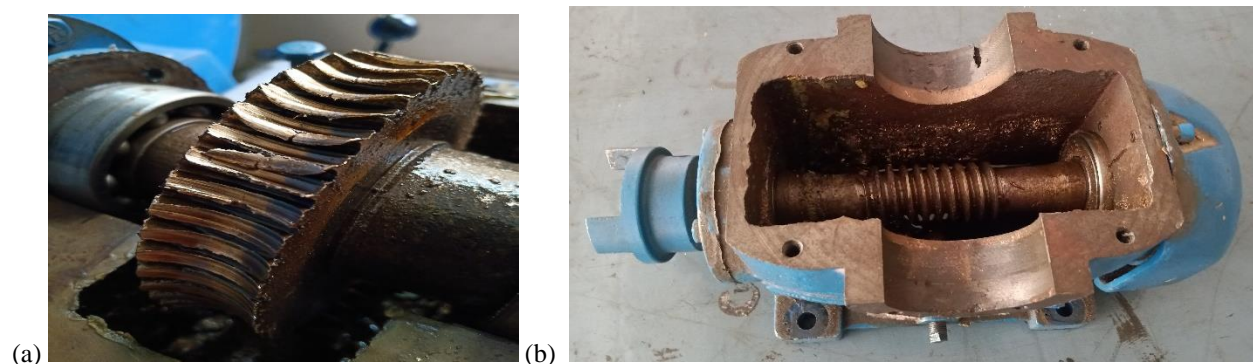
(a) Damaged profile of Worm wheel (b) Dry Gear Box
